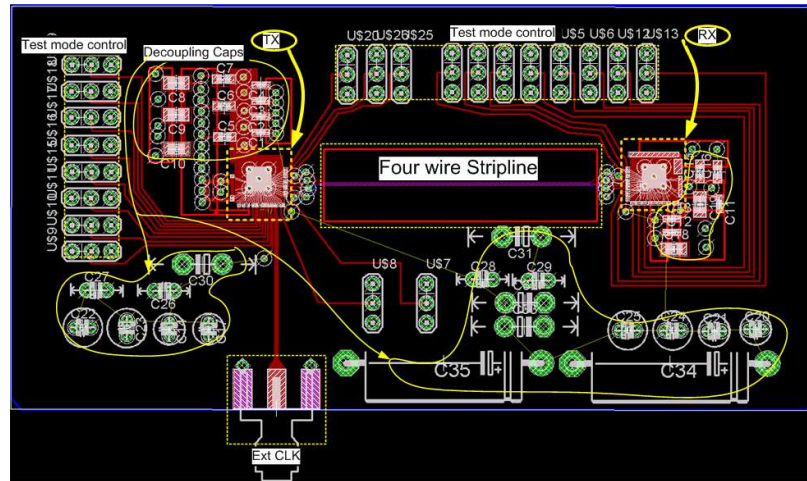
Drawn Printed Circuit Board for testing Multimode Signaling Transceiver with four stripline interconnect
